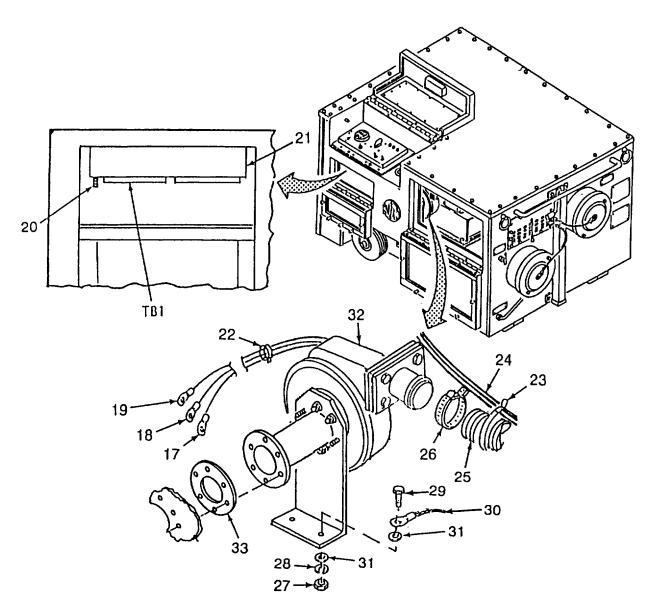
Combustor Fan Removal (Sheet 2 of 2)
